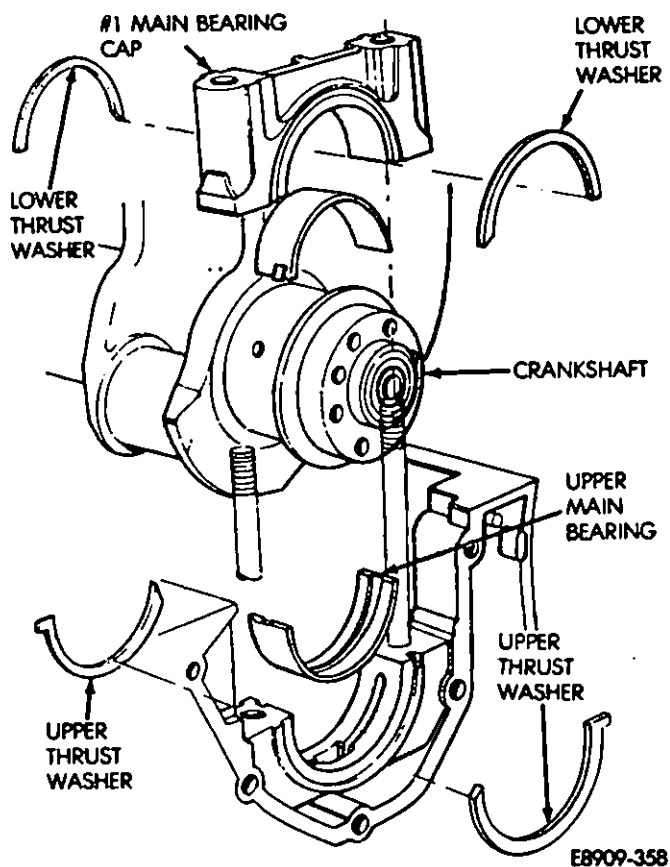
Main Bearing Cap/Bearing/Thrust Washers
